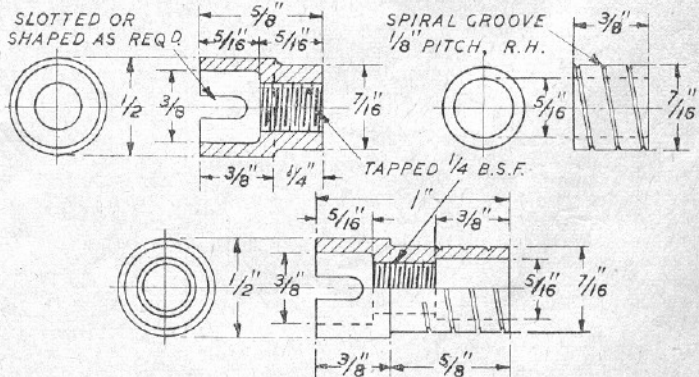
Coupling and oil retainer sleeve, showing (below) an alternative fitting combining both components
